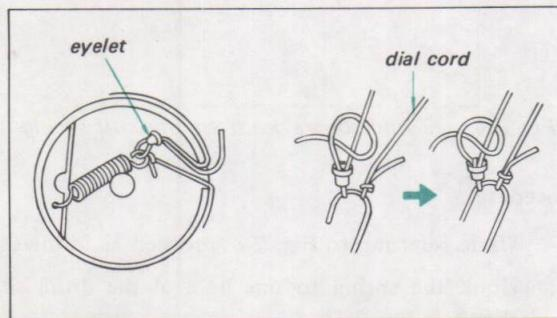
Finishing dial cord stringing and detail of the cord end
